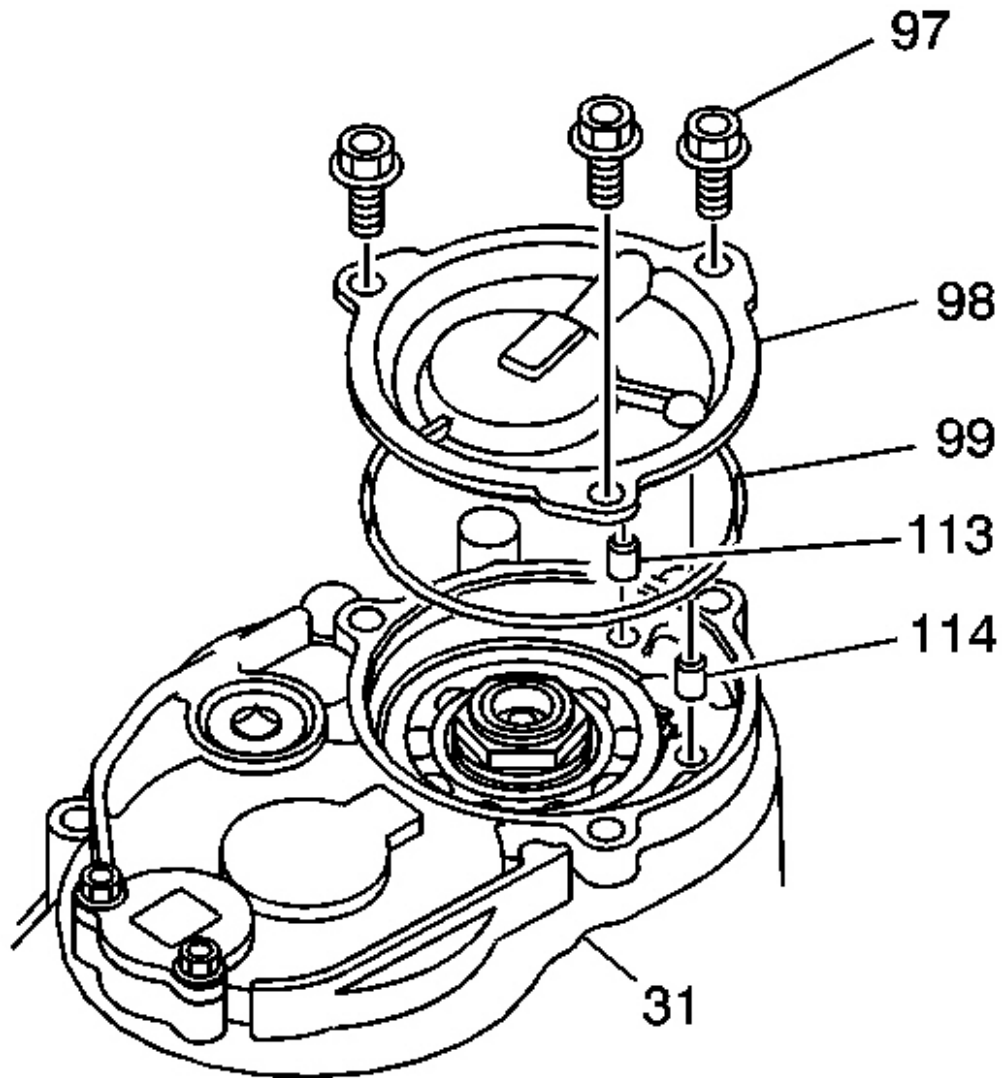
Mainshaft Rear Case Cover, Bolts, O-Ring Seal, Pin & Transfer Tube
